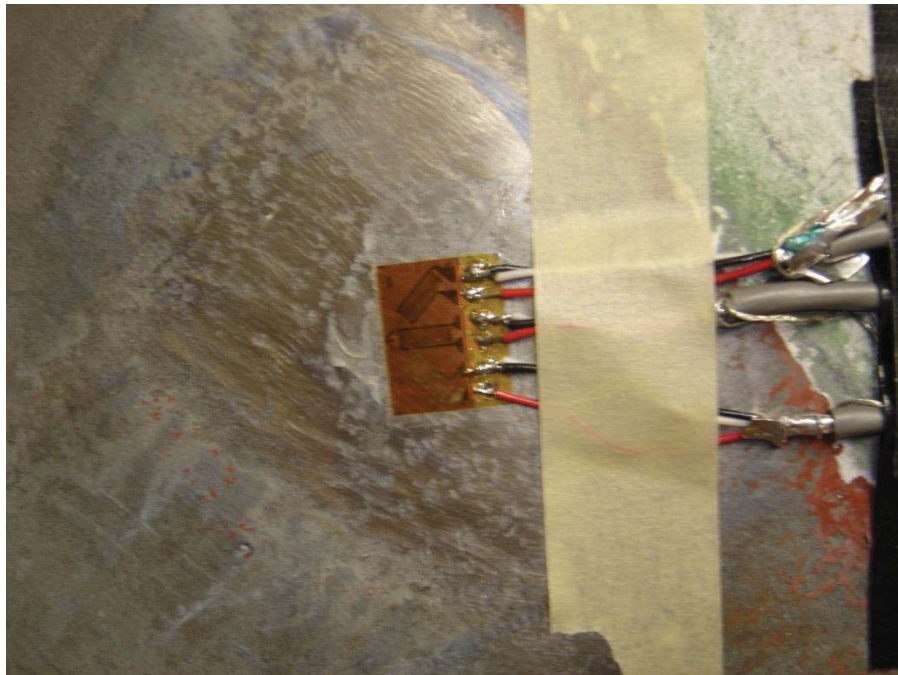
Strain gages at the head-to-shell weld location
